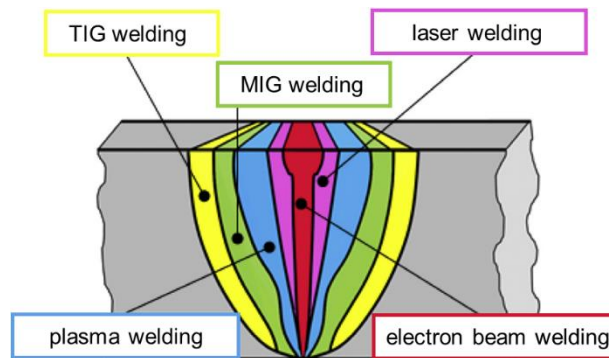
Geometry of a butt joint made from different welding techniques showing the narrower HAZ for electron beam welding [267].
